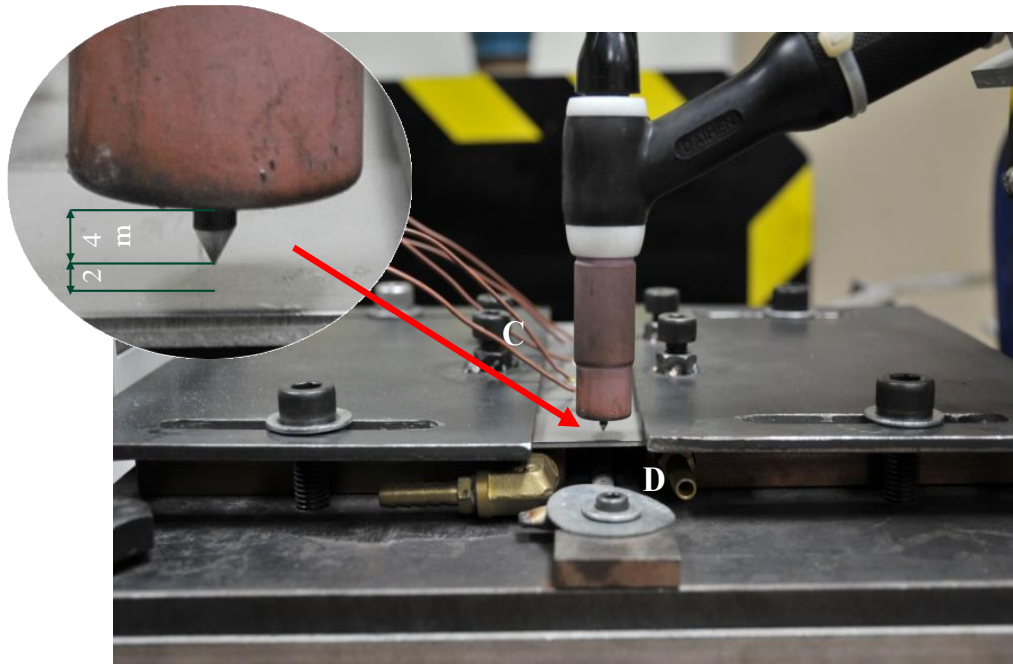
The work bench and the array of welding torch and shielding gas nozzles
